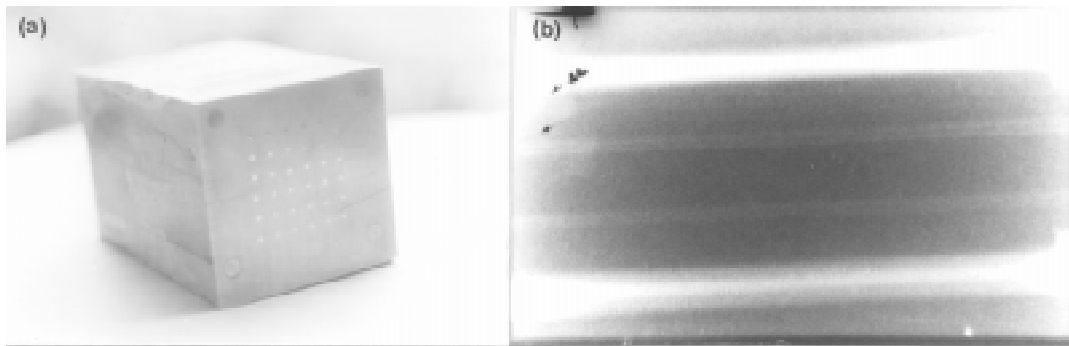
(a) Squeeze cast shape memory composite fabricated
